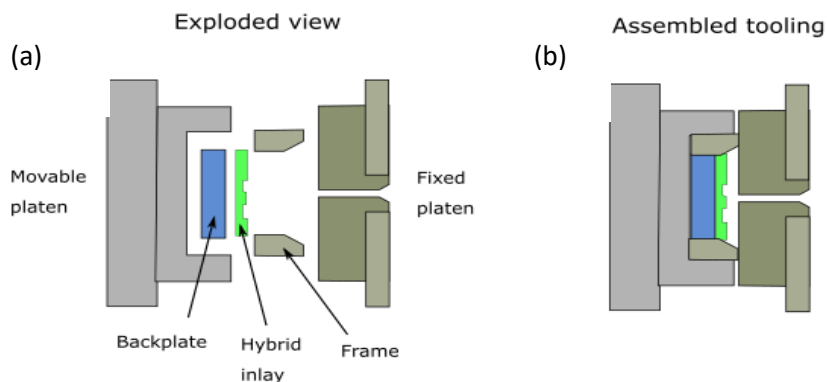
Overview of hybrid tooling setup used for injection moulding of micro-structures: (a) exploded view and (b) the view during operation.
